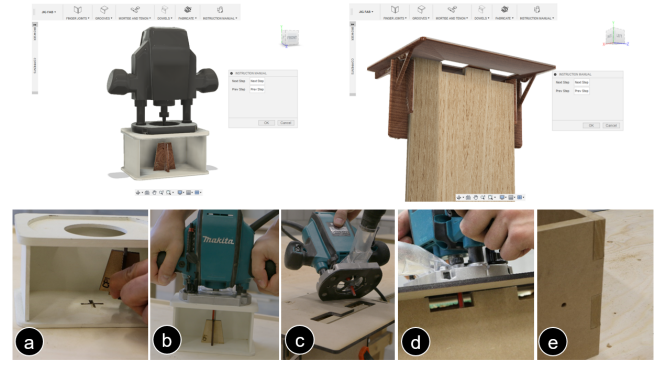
Making a finger joint: (a-b) setting the depth of the router using the depth transfer box and a custom template, (c-e) cutting the fingers using the custom generated finger joint jig
